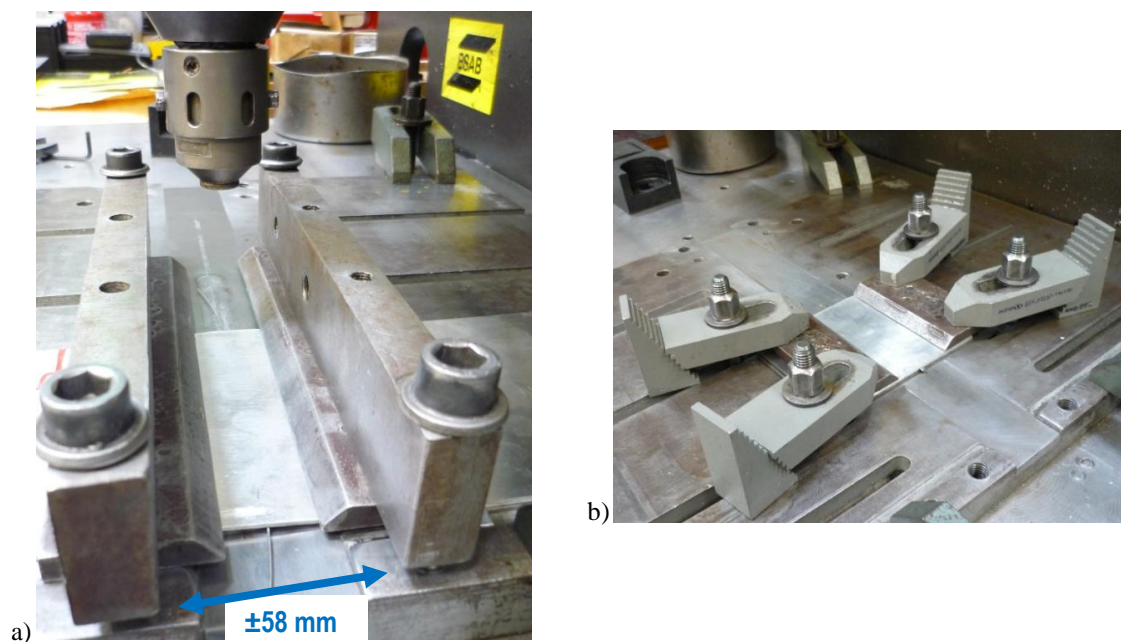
Fixturing equipment, a) group of plates with a maximum of aperture, b) clamping system on worktable of the FSW equipment.
